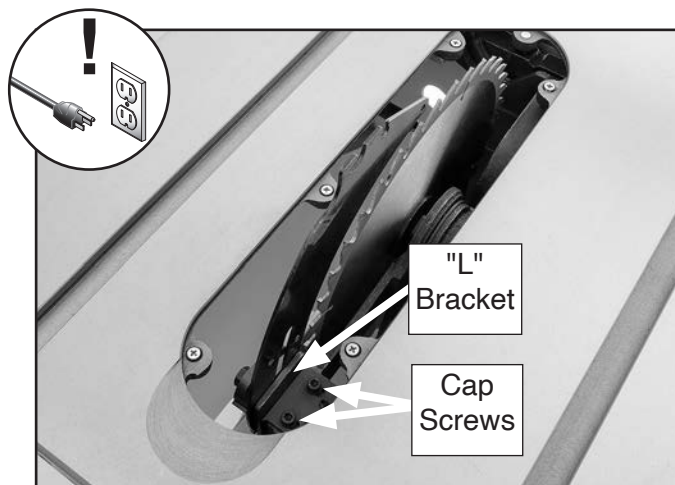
Cap screws for adjusting spreader/ripping knife position.
